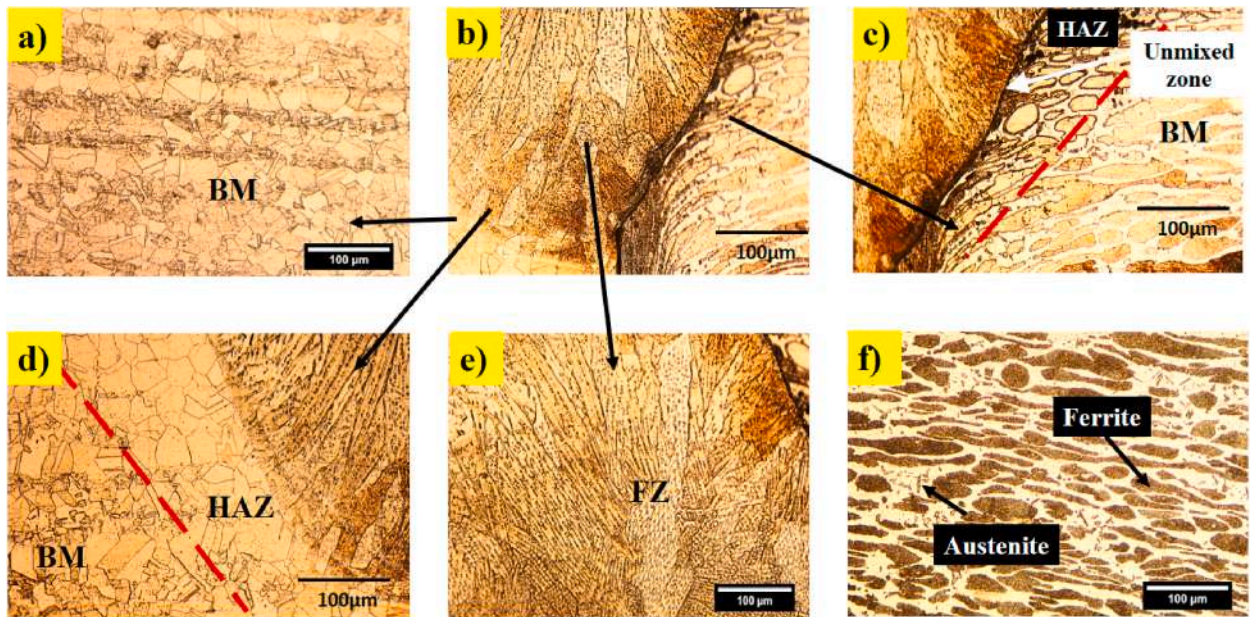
The weld section microstructure at laser power of 375 W, speed 100 mm/min, focal distance of 1.5 mm, a) Inconel 600 base metal, b) weld joint, c) HAZ duplex, d) HAZ Inconel 600, e) fusion zone, f) duplex base metal.
